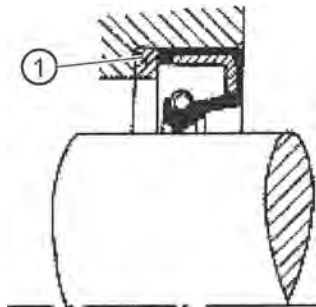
Inserting a spacer ring between the base of the bore and the rotary shaft seal
